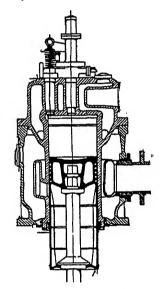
,—Example of Twocycle Engine having Cylinder Liner and Head Cast in One Piece with Separate Jacket.
